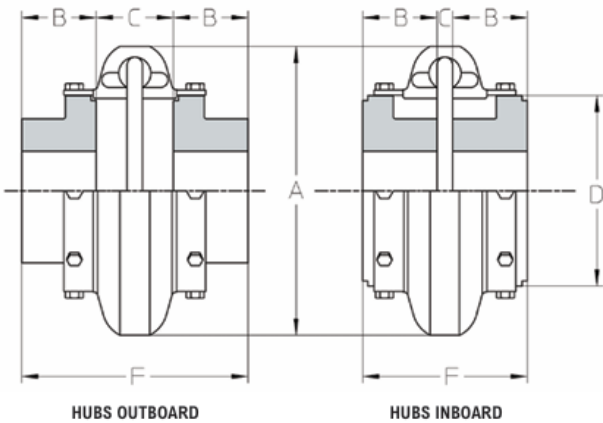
Cross-sectional technical drawing showing straight bore hub assembly constraints.
